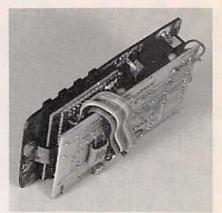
THE PROTOTYPE TRANSMITTER is housed in a plastic case with a single-sided, copper-clad PC-board blank machined as its top panel.
